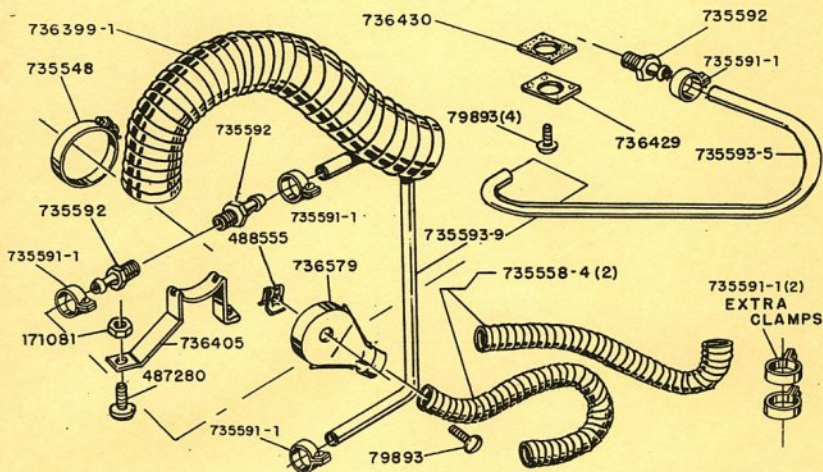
CONVERSION KIT FOR MODEL 735900 (Part No.736679)
